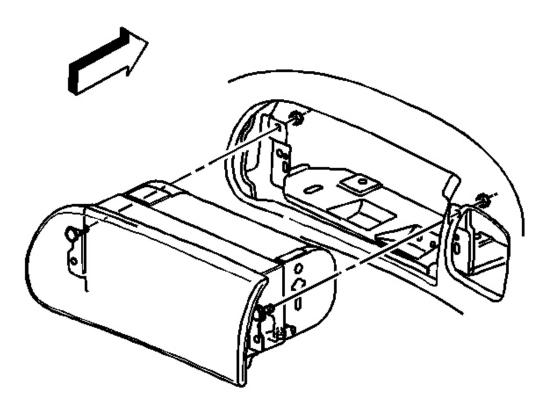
Locating Side PSIR Inflator Module Bolts Courtesy of GENERAL MOTORS CORP.
